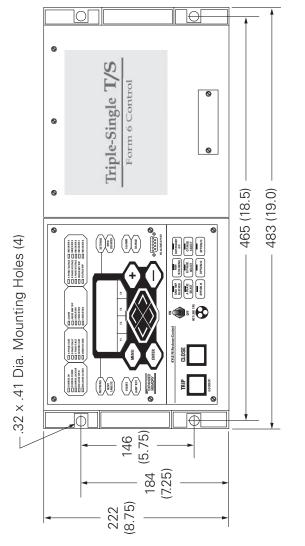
Form 6-TS rack mount recloser control dimensions mm (inches)
